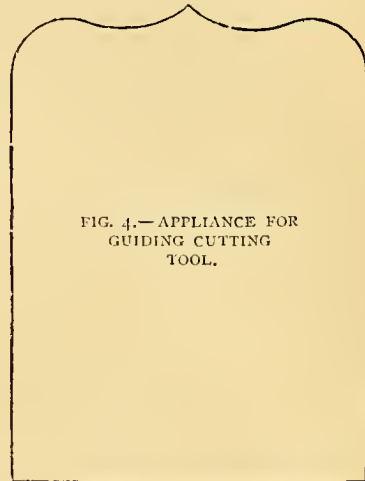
APPLIANCE FOR GUIDING CUTTING TOOL.
